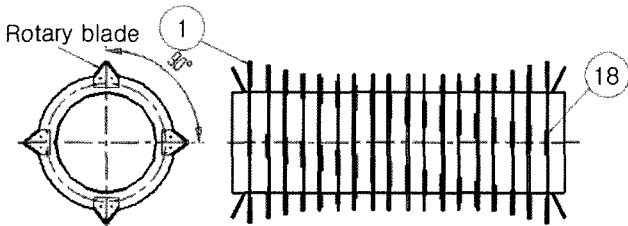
Spiral arrangement of four rotary blades per a flange.
